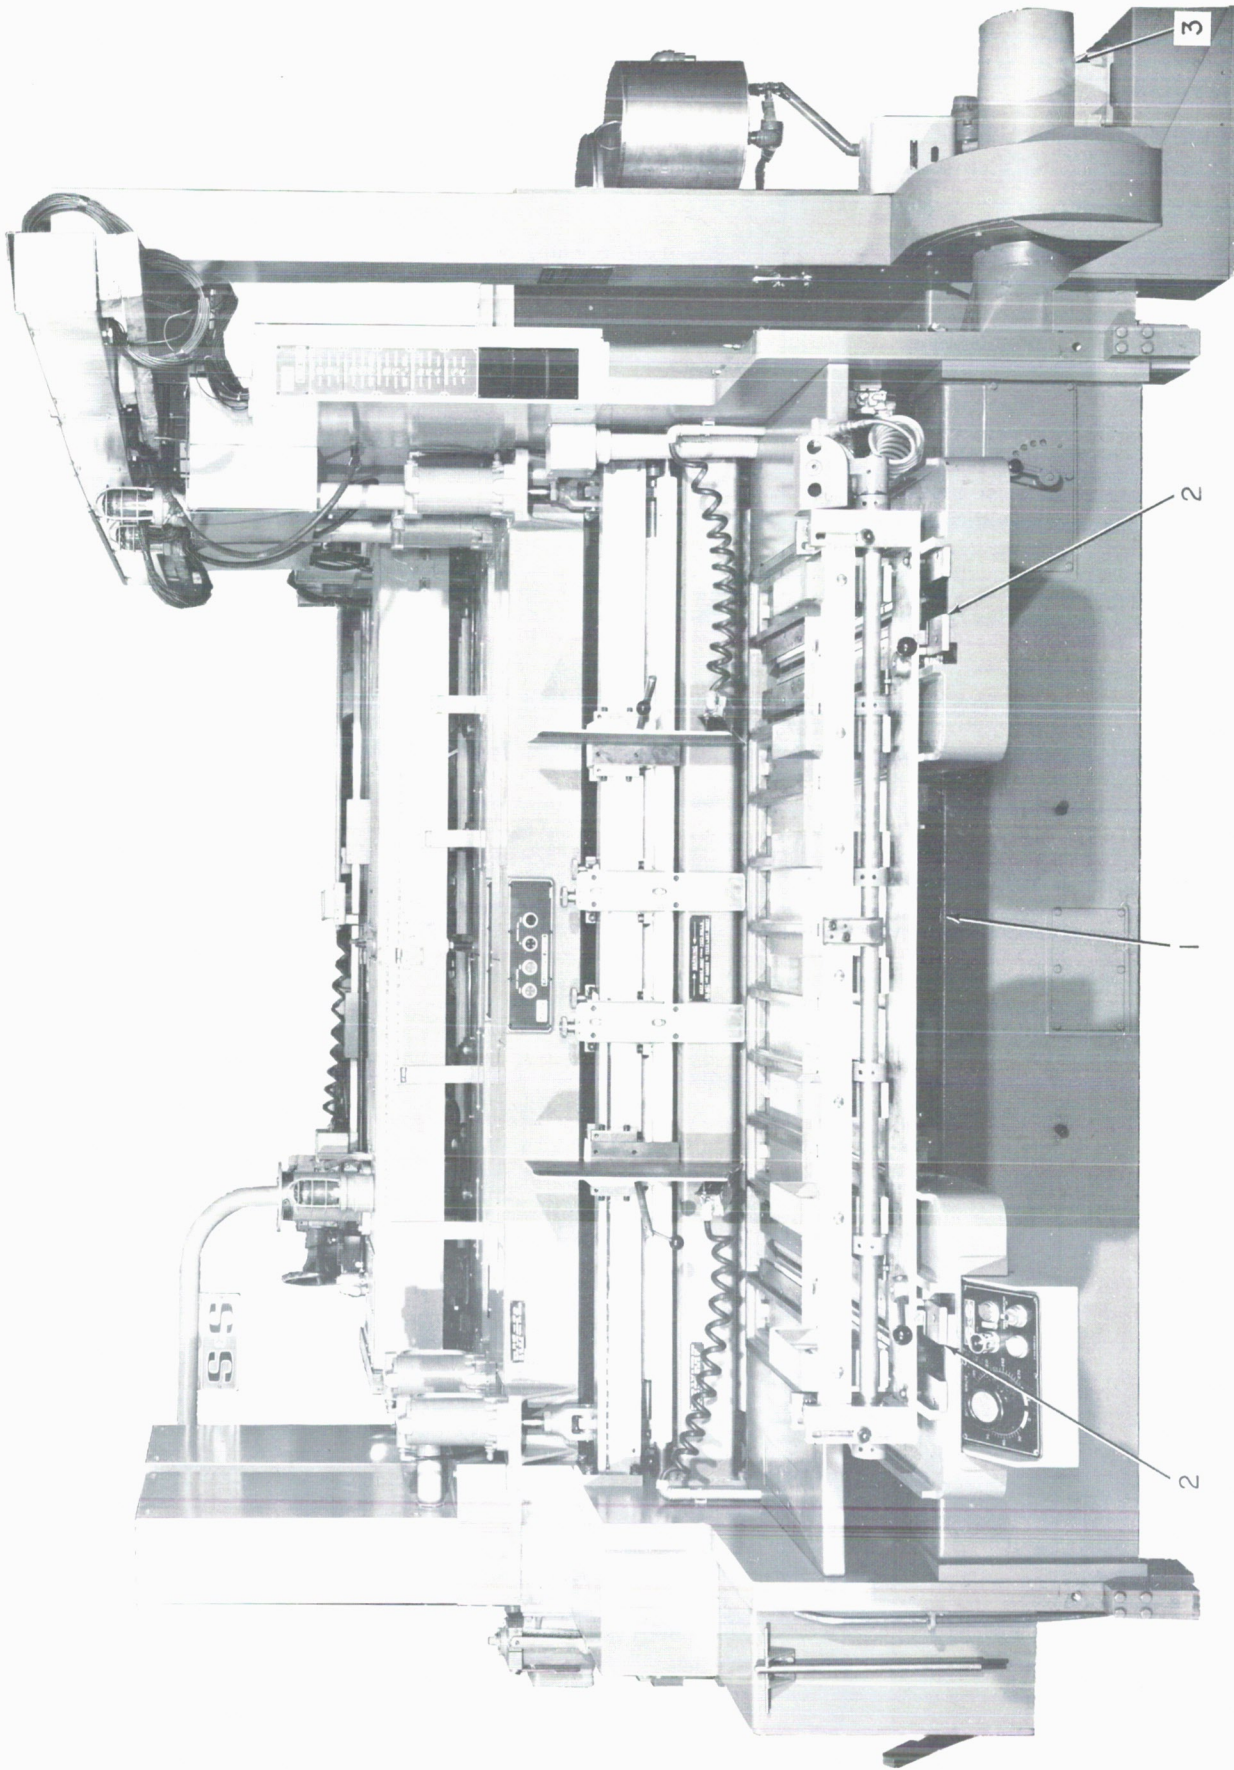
FEED SECTION LUBRICATION, FEED END VIEW
